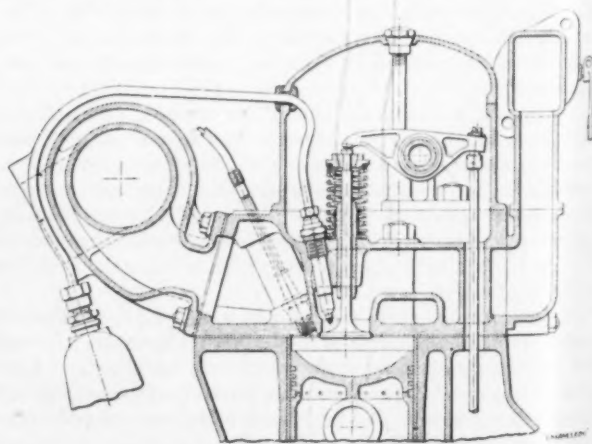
SECTION THROUGH CYLINDER HEAD AND ONE OF THE PISTONS
